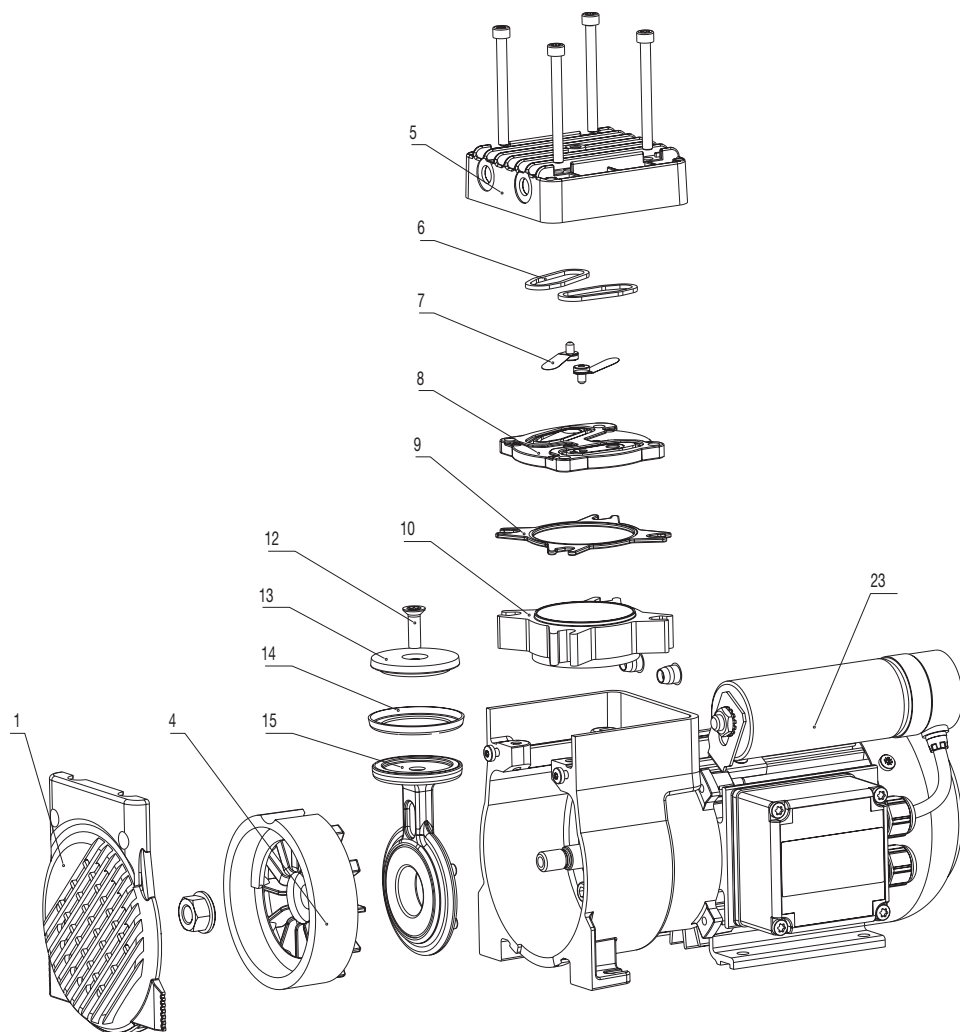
Oil-free piston compressors and piston vacuum pumps KK8 / KV8 with item numbers for spare parts
